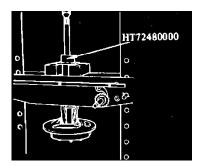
Removing rear axle shaft. Exc. independent suspension (Typical)
